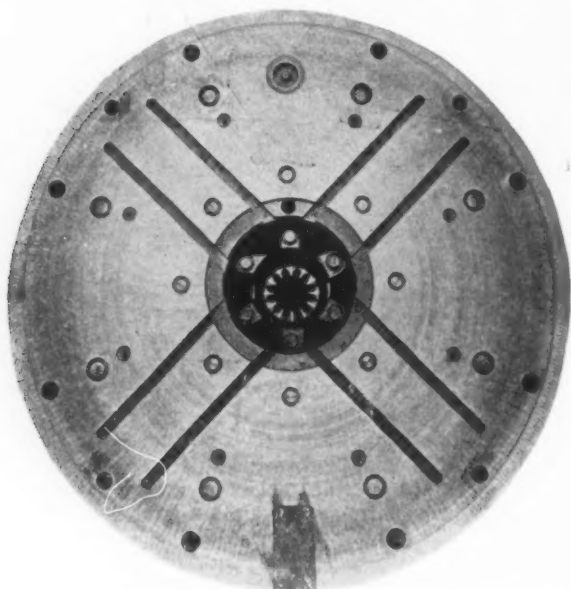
Top View of Tool Head As It Would Appear in Operation
